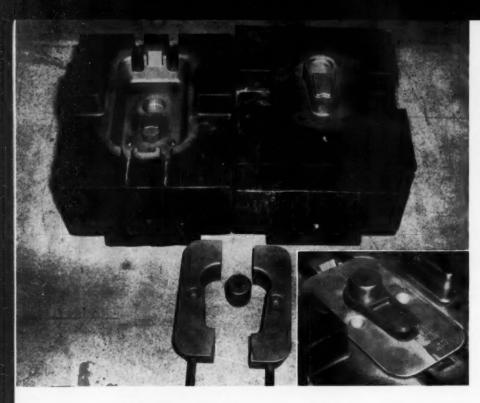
Split Inserts Which Are Used in Forming This Experimental Part to Precision Tolerances and Without Draft. Inset shows part which is made of A.I.S.I. 4340
